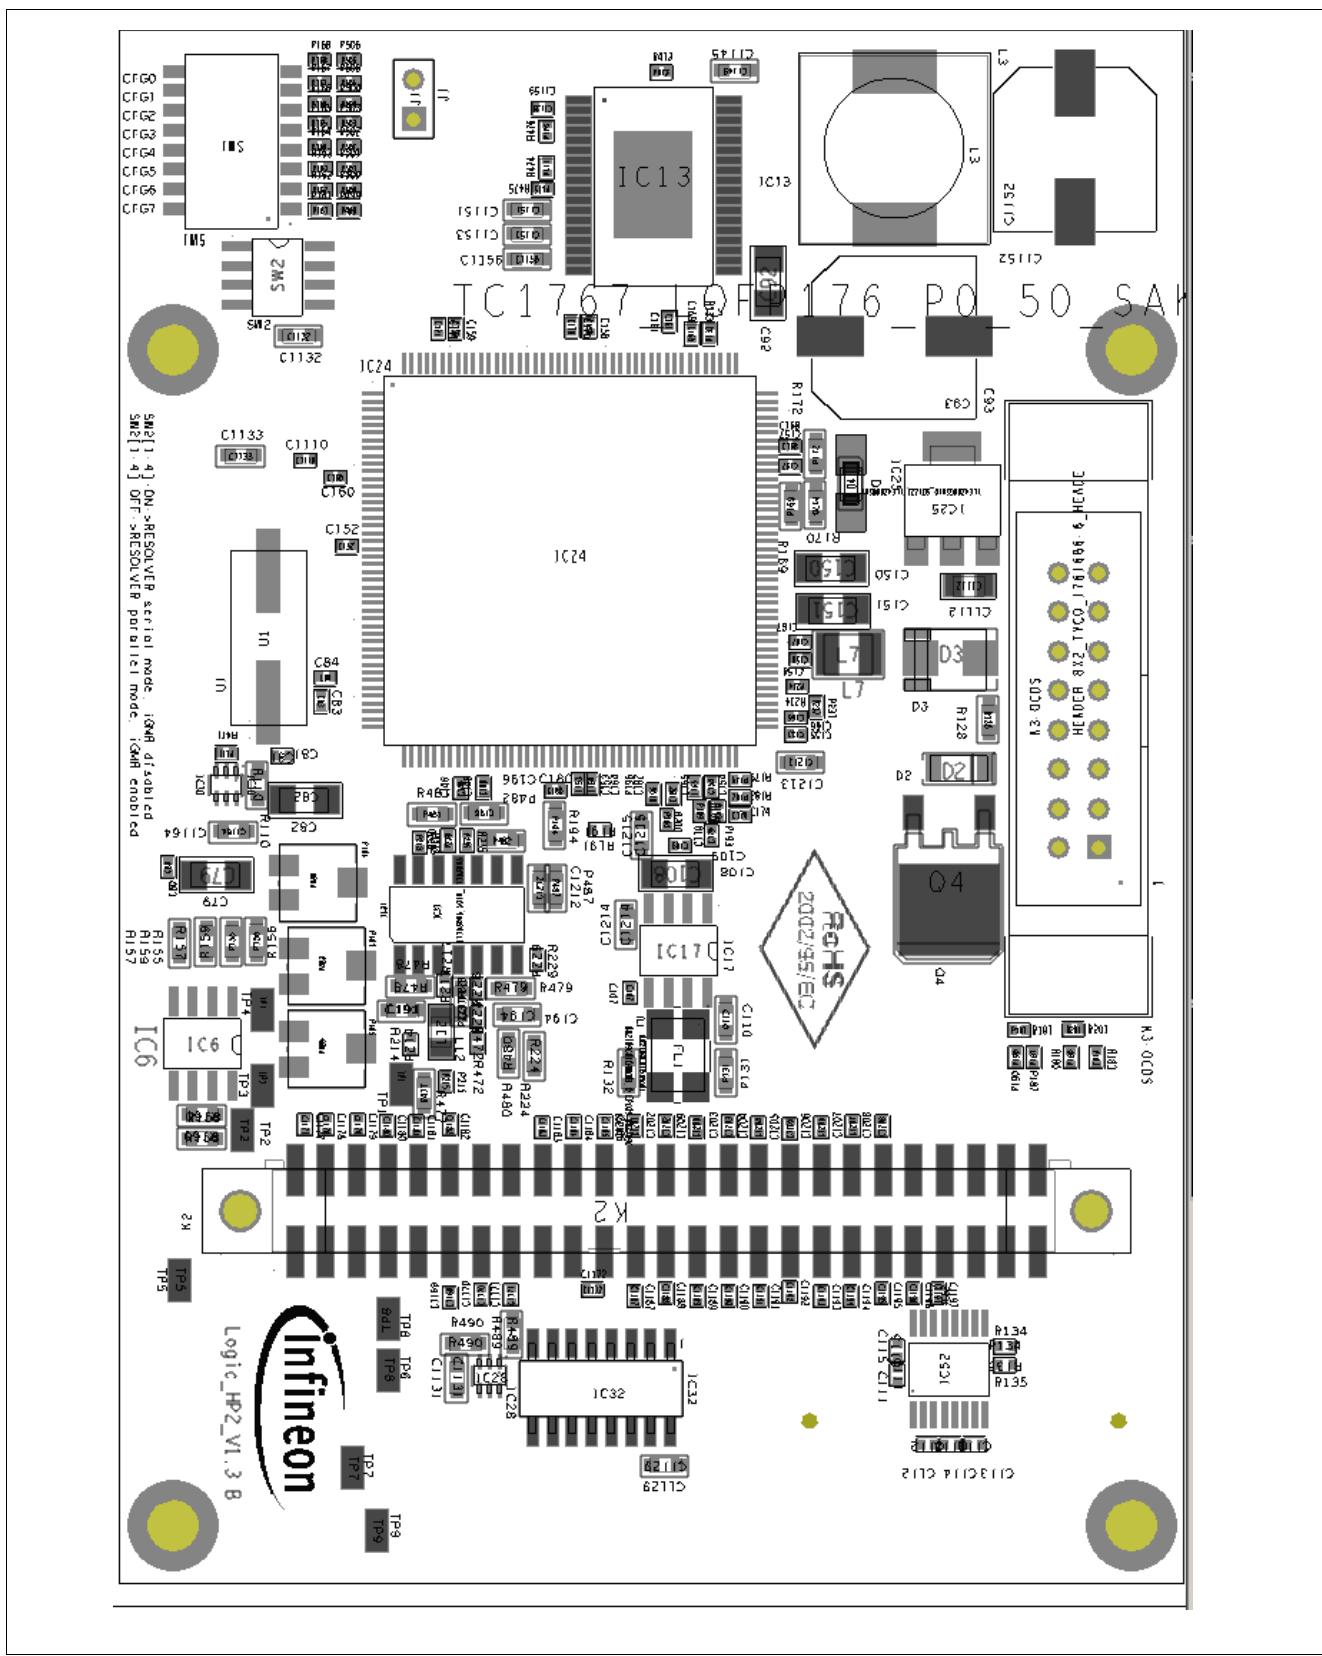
Assembly Drawing of the Logic Board v1.3b (Top)
